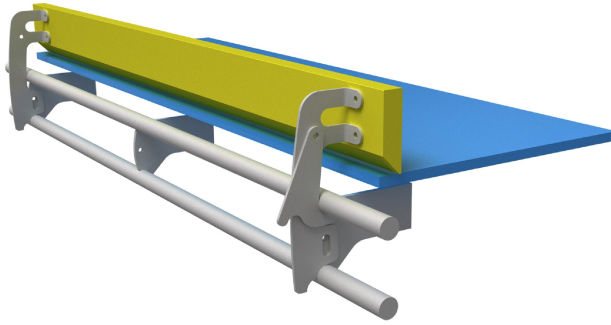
Draft for New Design on Conveyor Frame and Side Guard Fasteners
